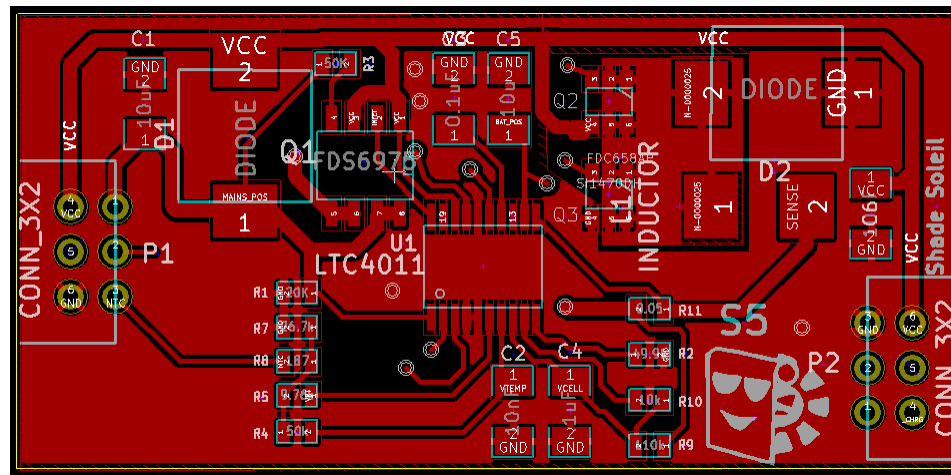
Top layout of PCB S5. This board is 25.4x52.6 mm (1"x2.07").
